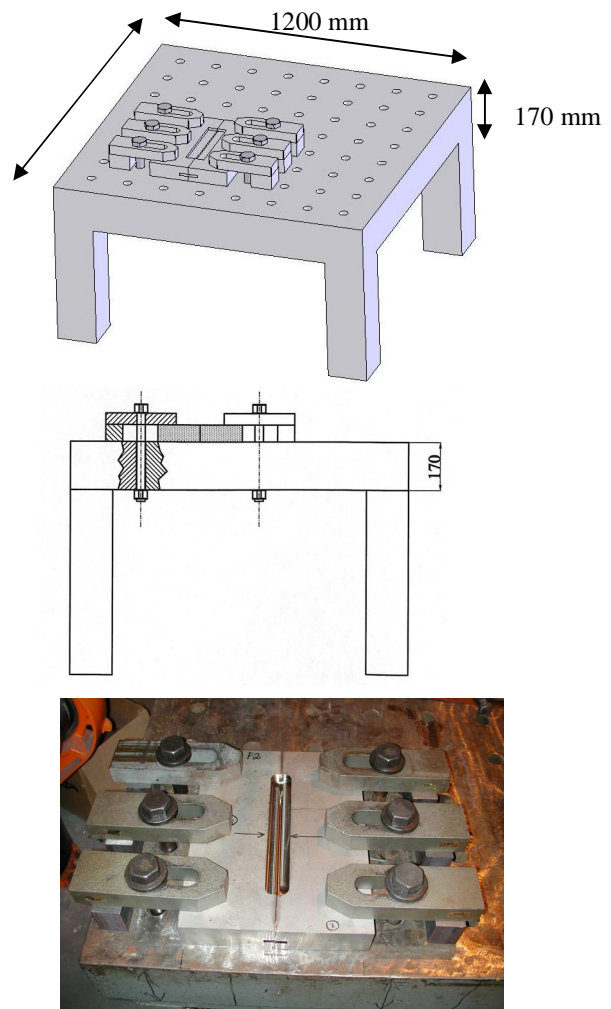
Test set-up for rigid clamping of welded test piece.
